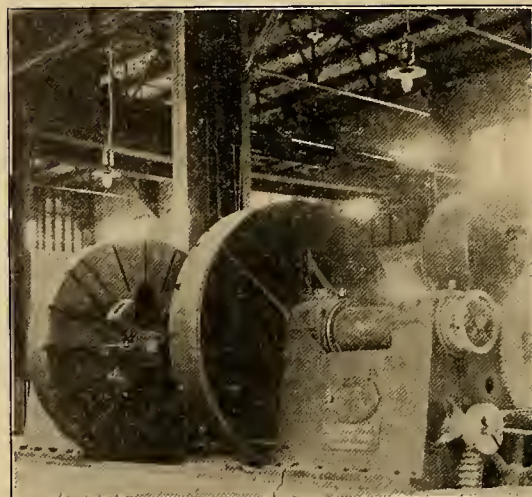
Lathe With 90 in. Driving Wheel and 50 h.p. D.C. Variable Speed Motor Direct Connected.
